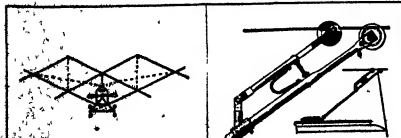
H. H. Chaseley's invention for a trolley, showing the wheel and lever mechanism.
